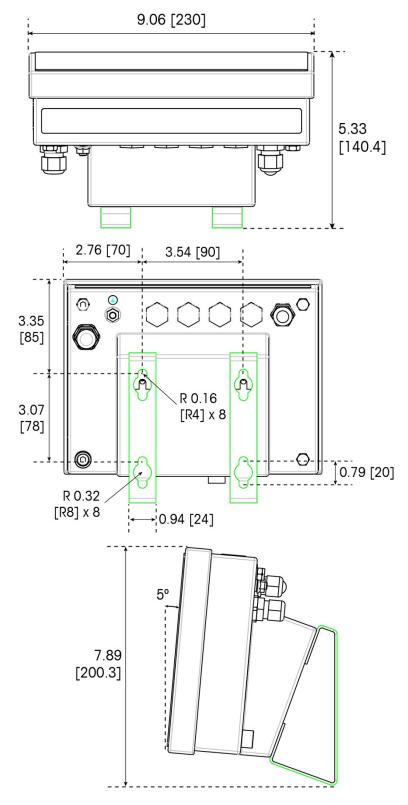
IND256x Dimensions, with Fixed Wall-Mount Bracket
